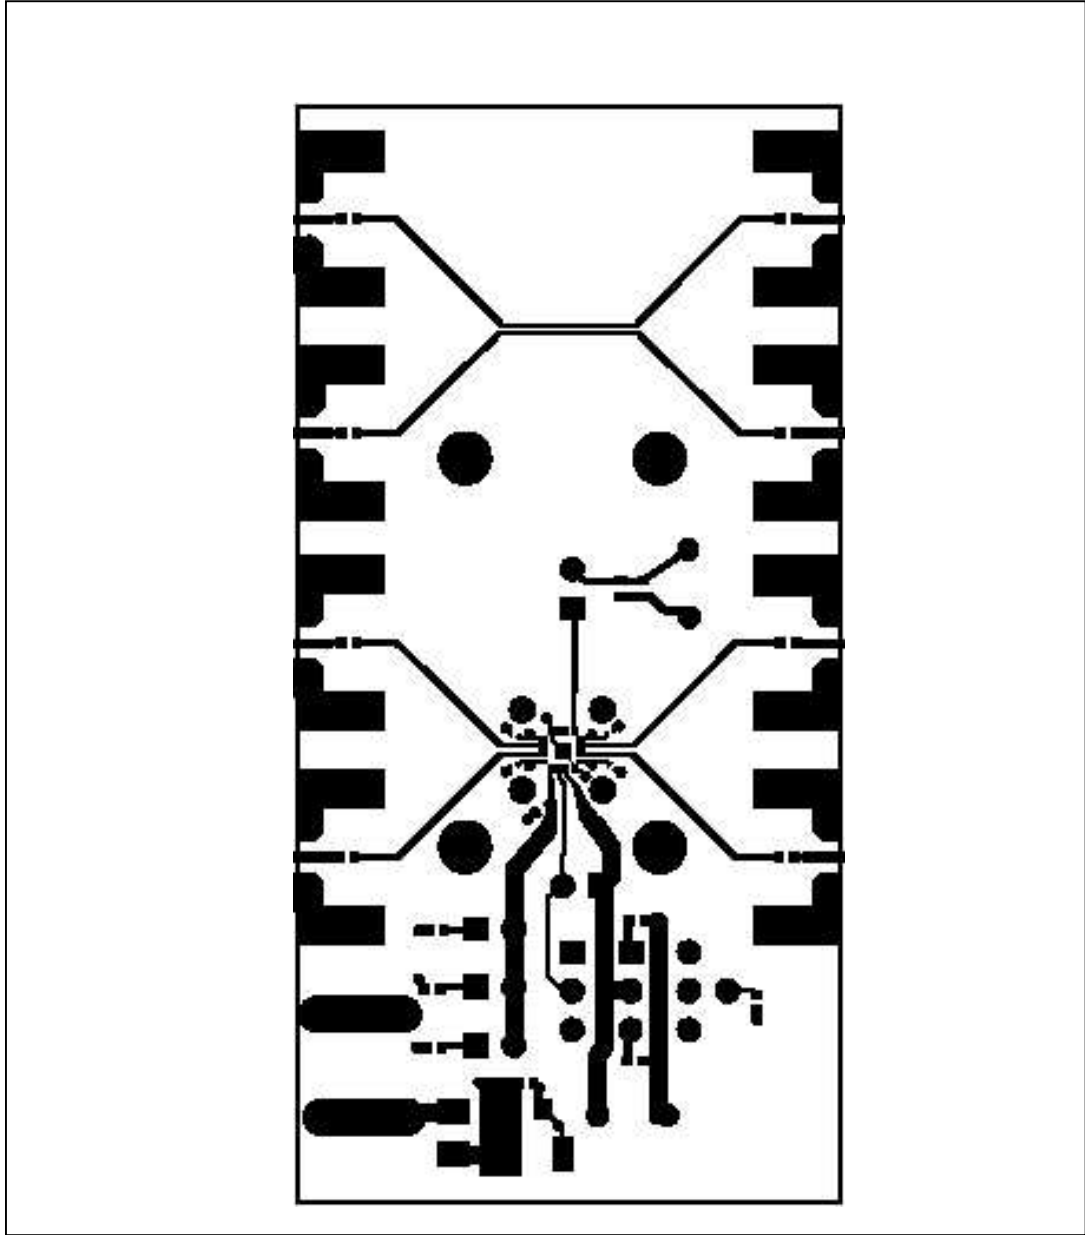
MAX3746 EV Kit PC Board Layout – Component Side (2X)
